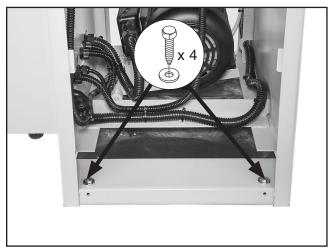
Access panel removed to expose mounting hardware (left side shown).
